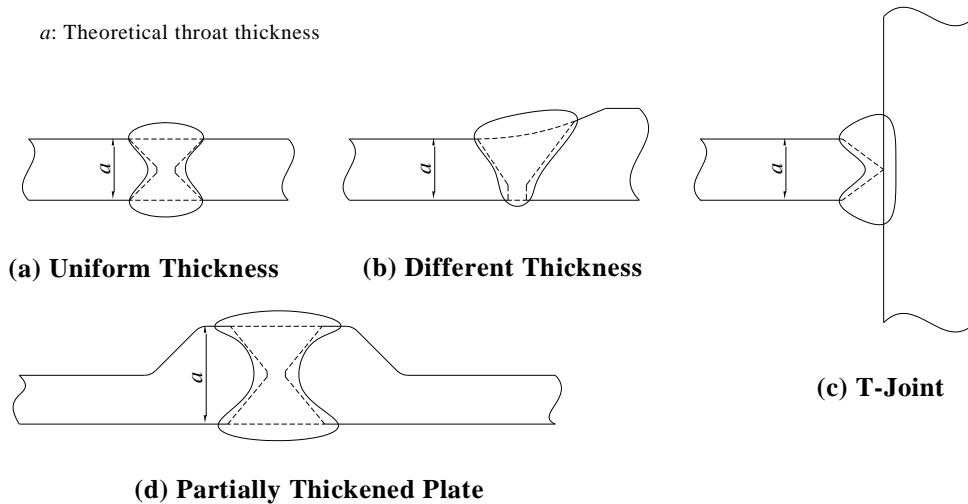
Theoretical Throat Thickness in Full Penetration Groove Welding
